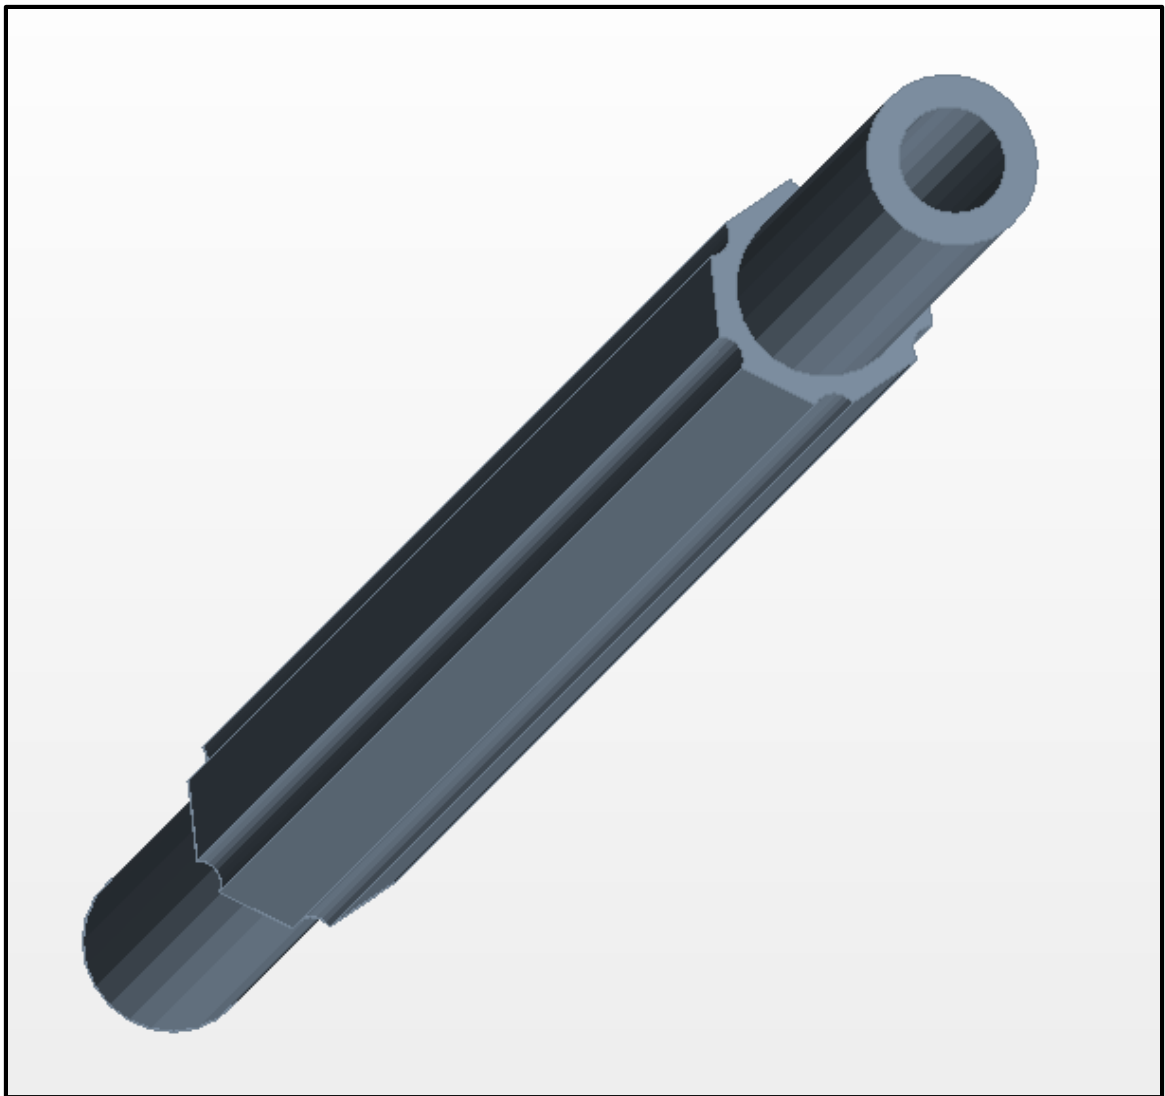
Two Fluid Fuel Channel Assembly with Coolant Channel Edges
